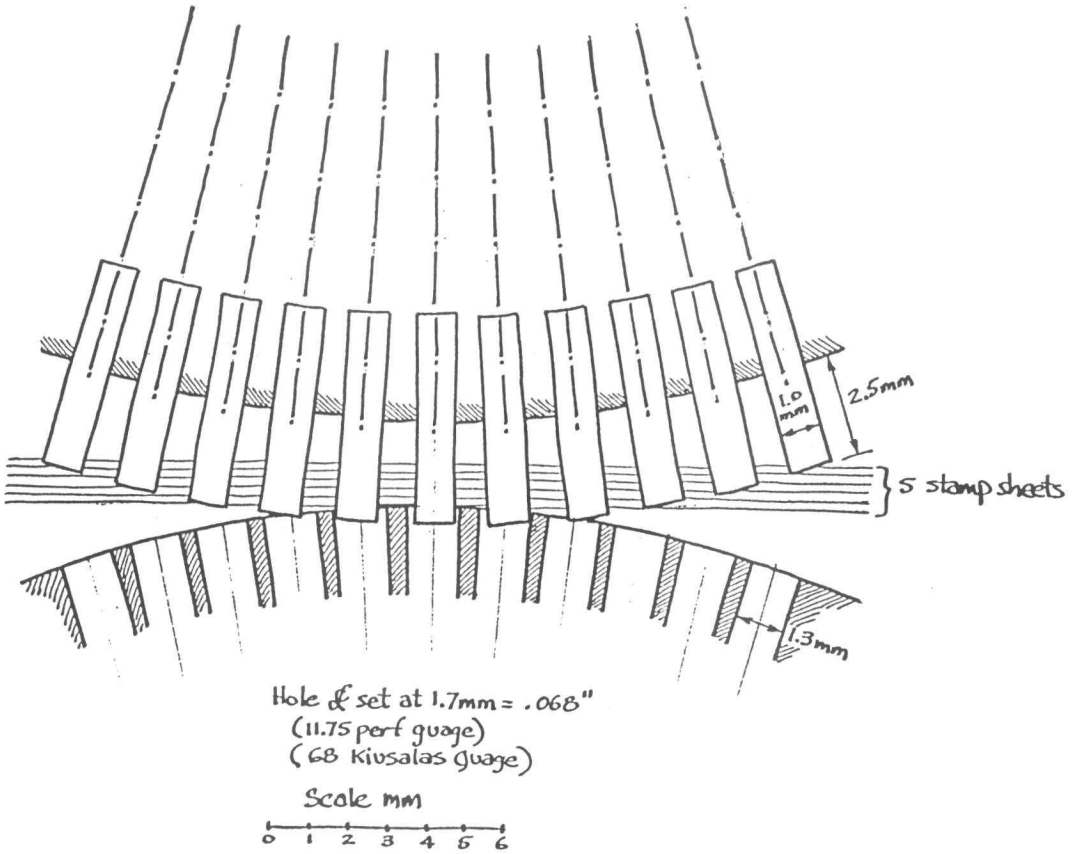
DETAILED SIDE VIEW OF BEMROSE ROTARY PERFORATOR SHOWING PIN AND HOLE CONFIGURATION DRAWN TO SCALE.
